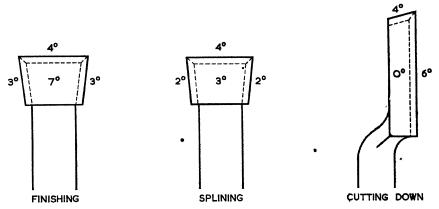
Correct clearances and cutting angles for solid or one-piece planer tools
